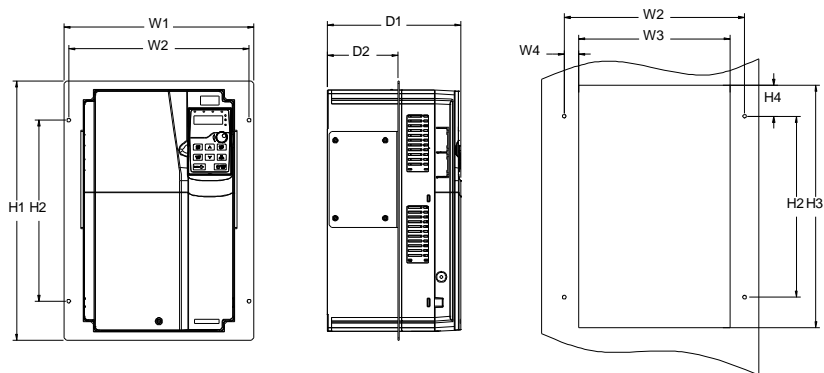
Flange mounting for 380V 30-75kW VFD models
